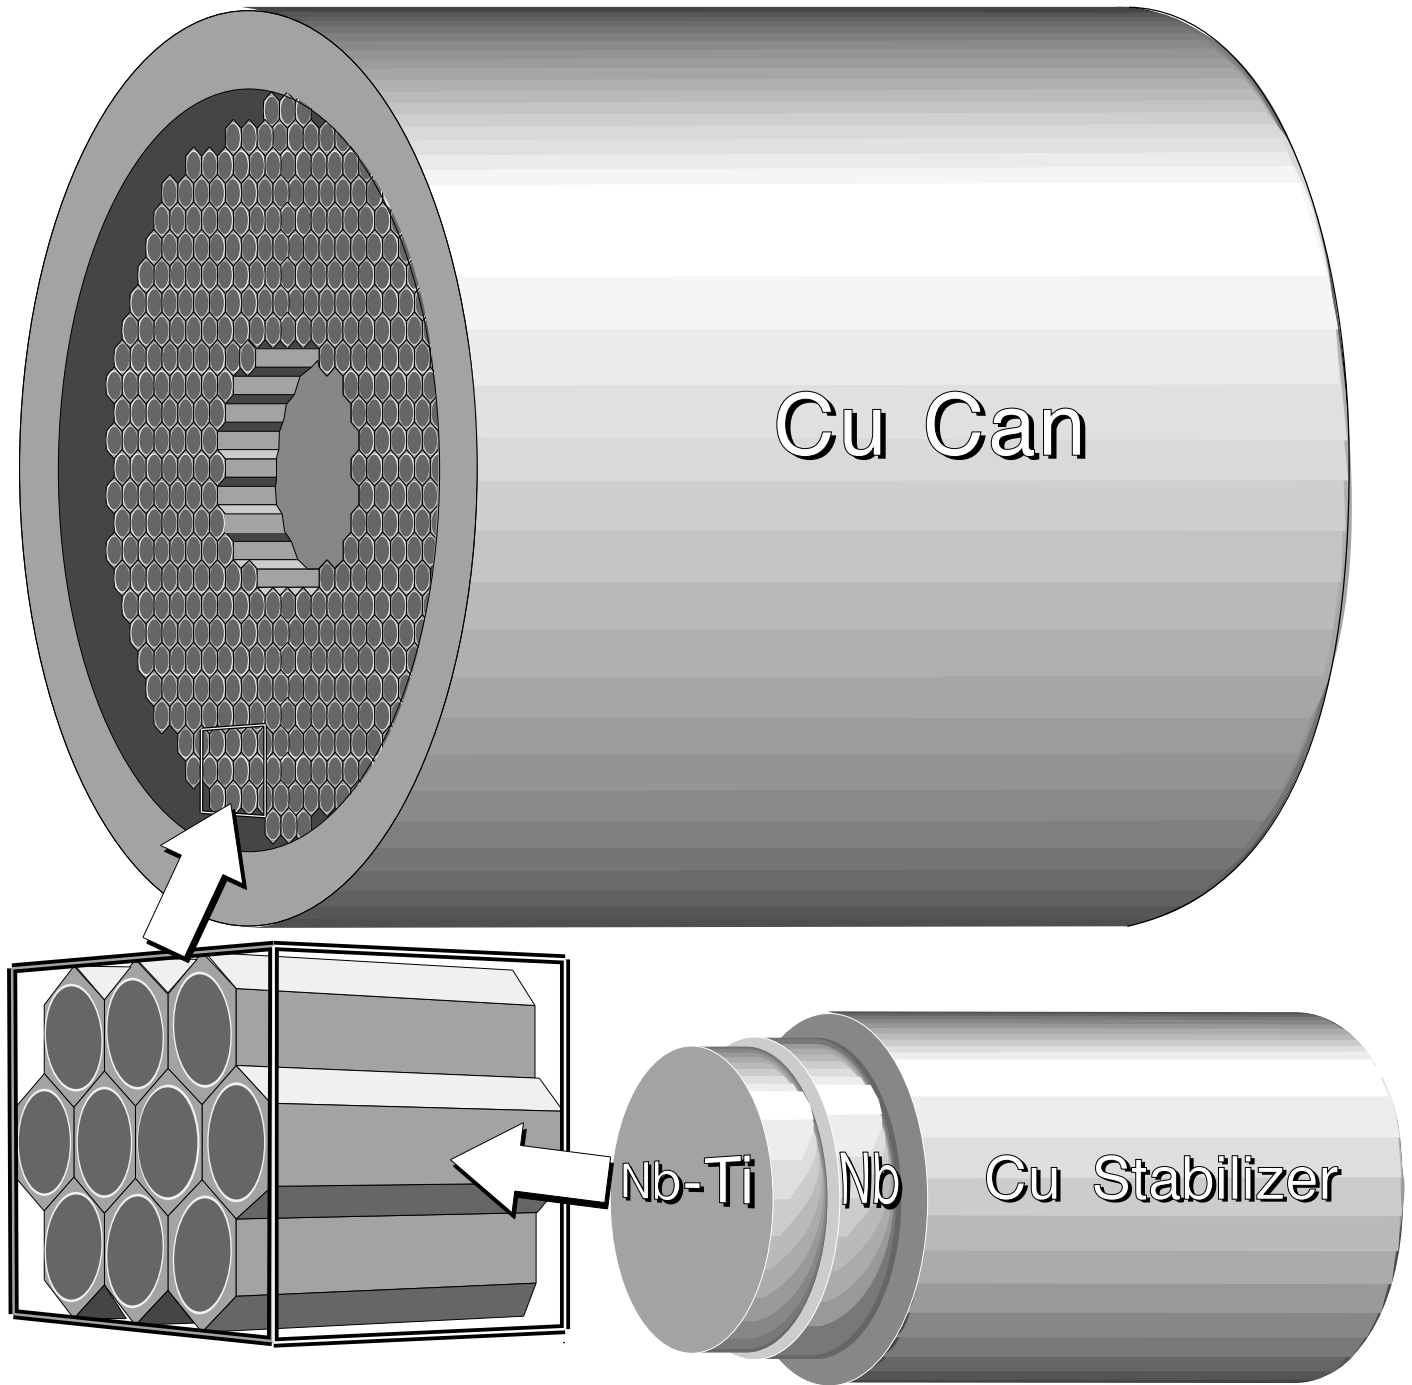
Schematic Illustration of Multifilamentary Billet Assembly
